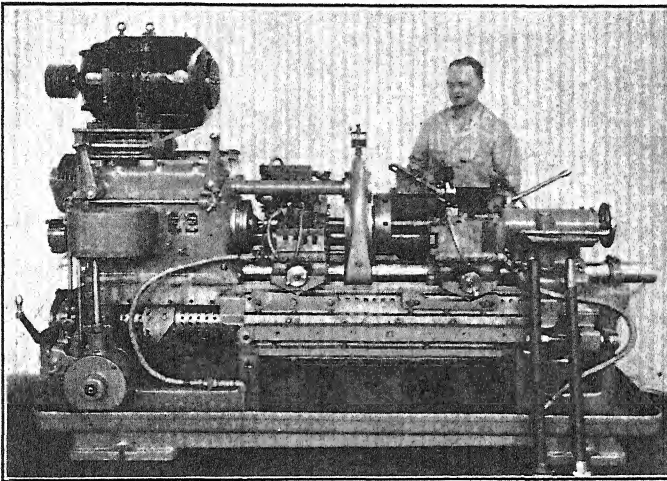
A Plan View of a Setup on the Duomatic Lathe for Machining an Automobile Cluster Gear.
